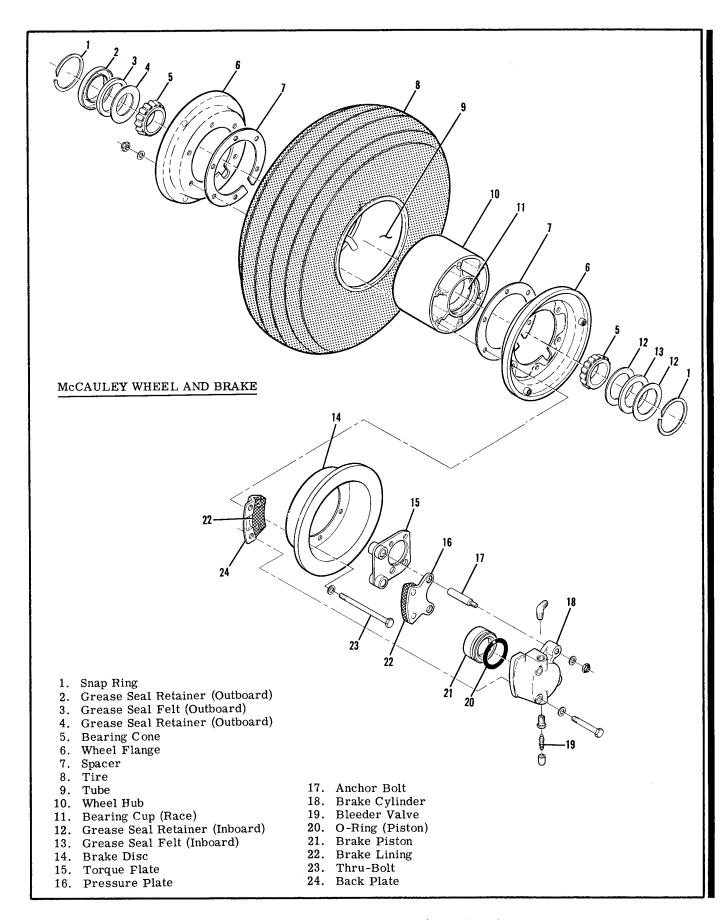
Wheel and Brake (Sheet 2 of 2)
